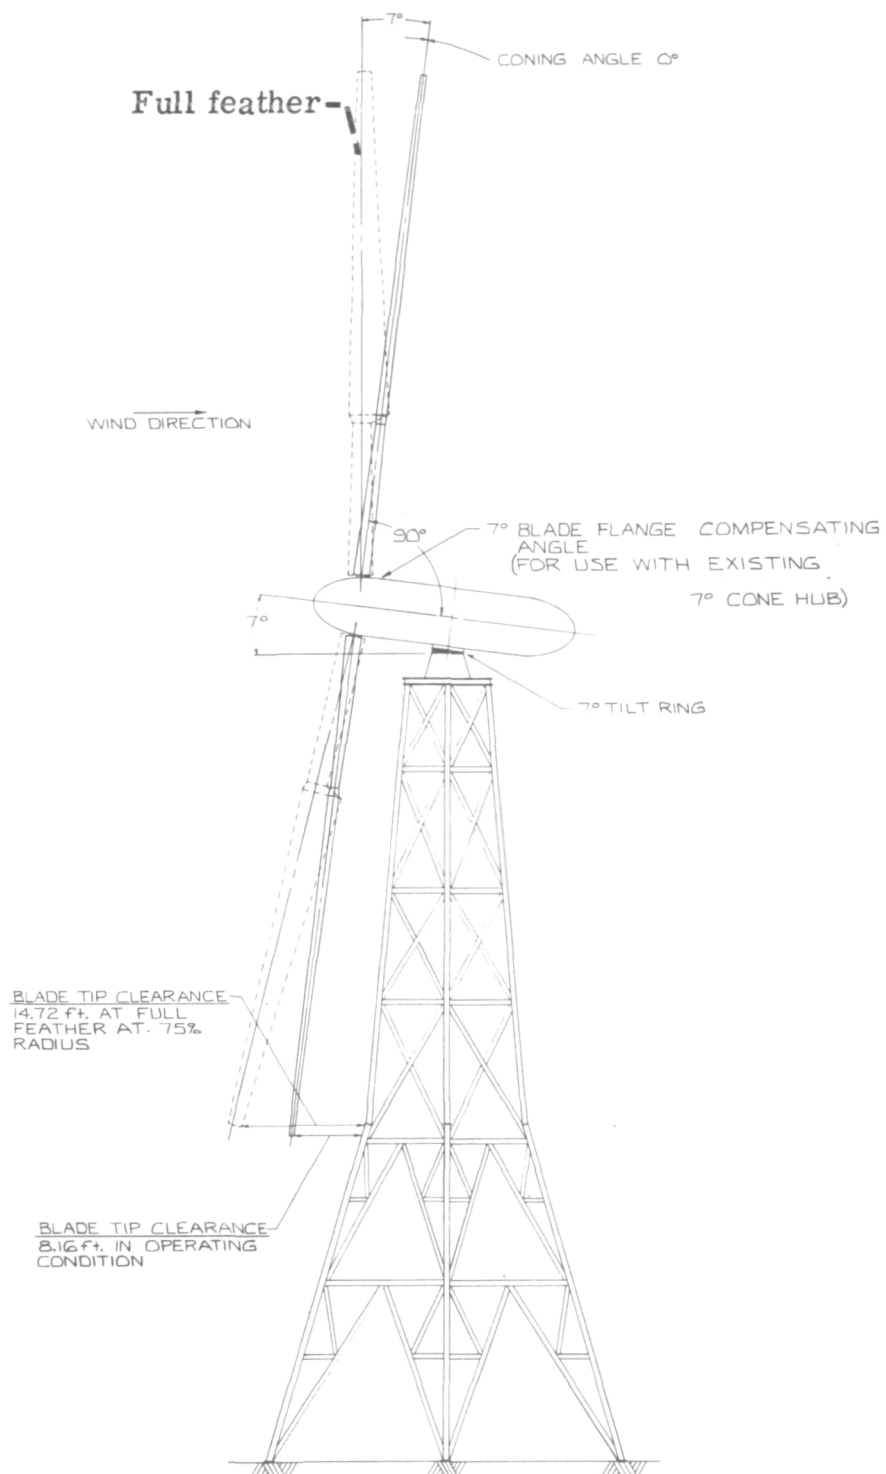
Scheme II. Rotor upwind of tower. Zero blade coning angle.
